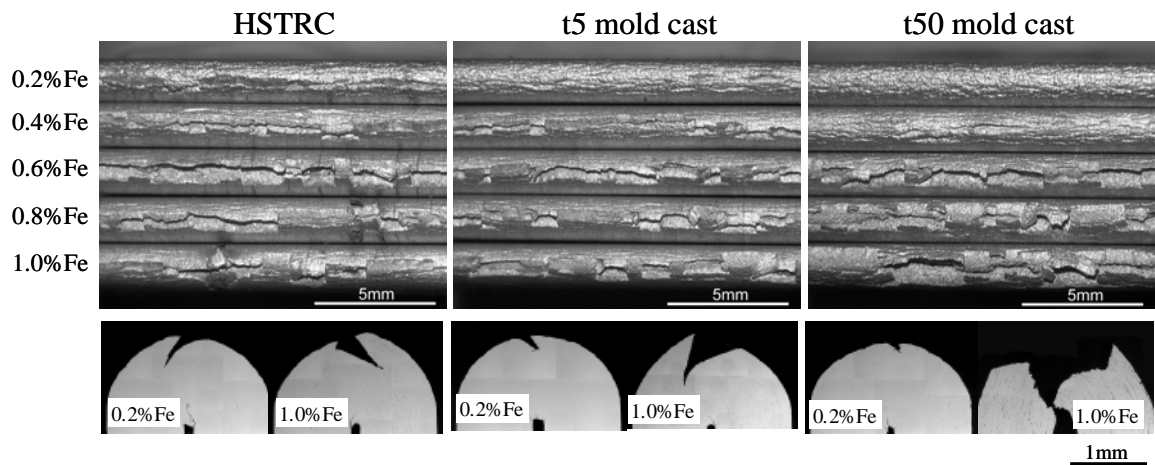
Appearances of specimen surface (upper) and cross section (lower) after bending test.
